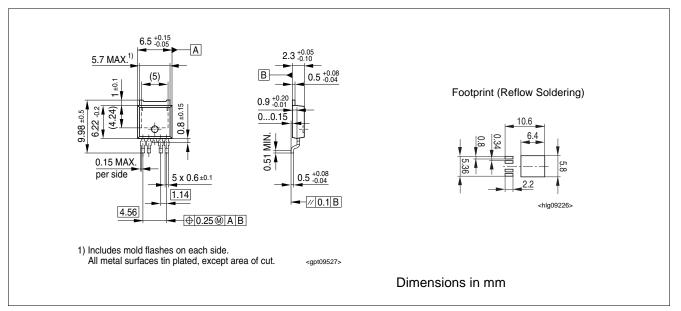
PG-TO252-5-11 Package Outline and Footprint
